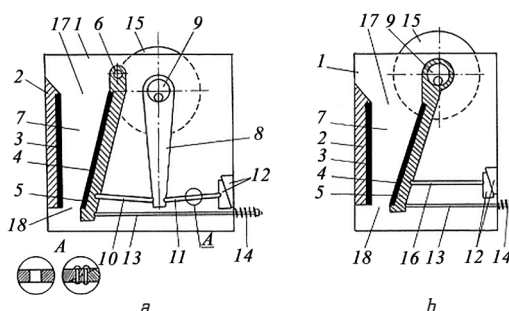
Execution of jaw crushers: *a* – with a simple jaw movement; *b* – with a complex movement of the cheek: 1 – body; 2 – fixed jaw; 3, 4 – armor plates; 5 – movable jaw; 6 – suspension axis of the movable jaw; 7 – crushing chamber; 8 – connecting rod; 9 – eccentric shaft; 10 – front spacer plate; 11 – rear spacer plate; 12 – adjusting wedges; 13 – rod; 14 – spring; 15 – flywheel; 16 – spacer plate; 17 – loading hole (mouth, pharynx); 18 – discharge hole
